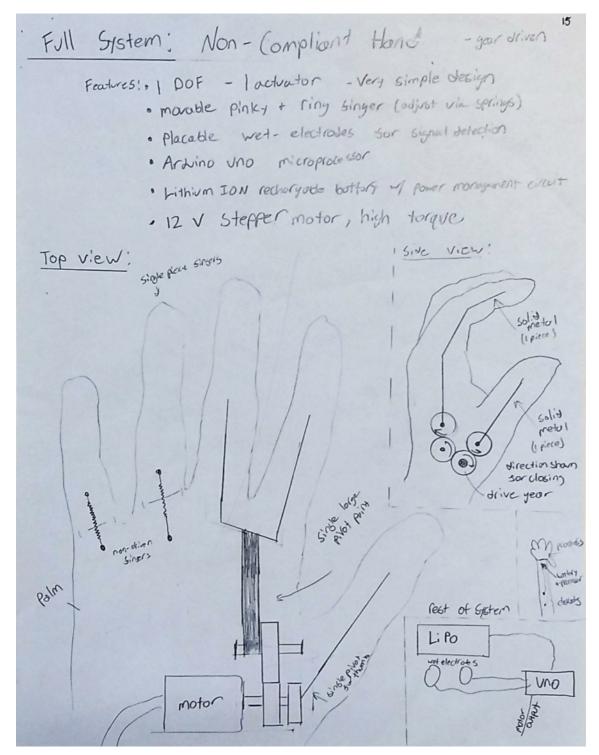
Gear-Driven Non-Compliant Hand Sketch
